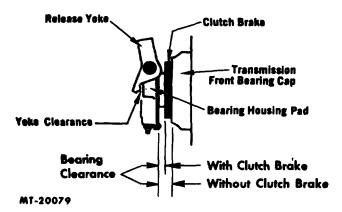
Release Bearing Clearance (Lipe LP, LPA Clutches)
